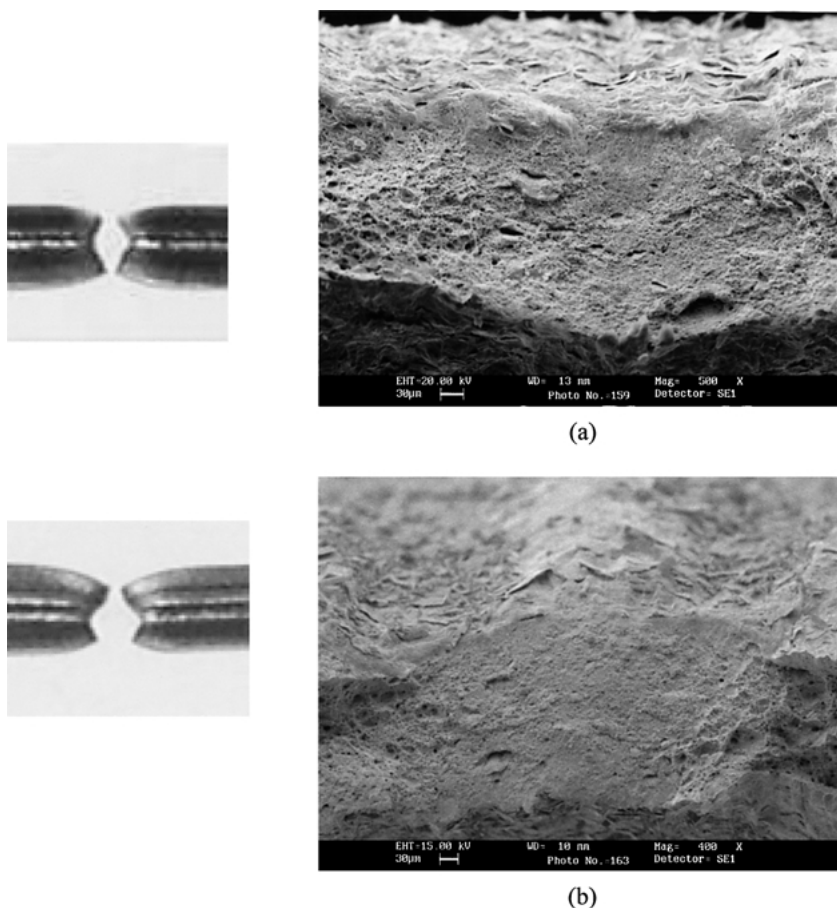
Photographs of fractured specimens: Type A (a) and Type D (b).
